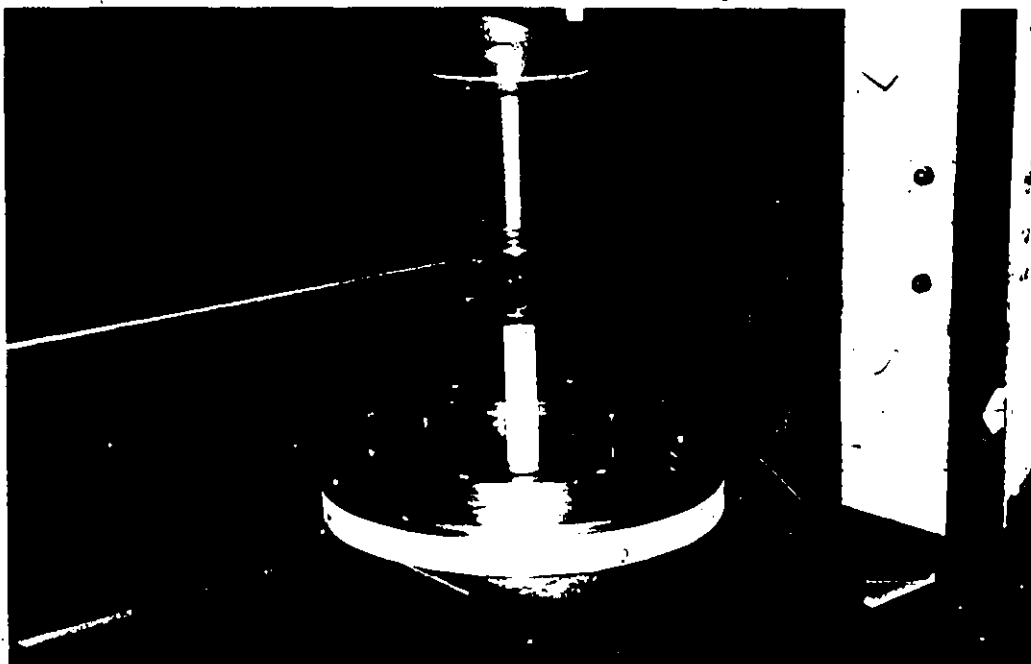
Rotor SSH-1 Assembly. The SSH spoke plates, made from maraging steel, then heat-treated, must be compressed as shown in order to fit into the ring.
